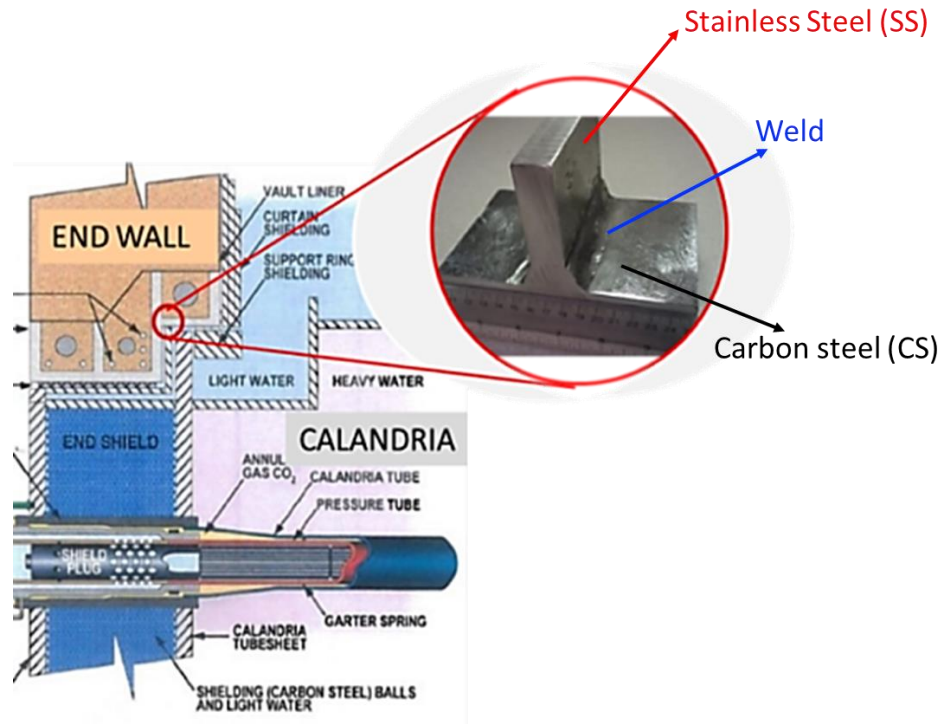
Schematic representation of the calandria tank assembly and its supporting structures in a CANDU reactor and the carbon steel-stainless steel weld joint block provided by Ontario Power Generation
